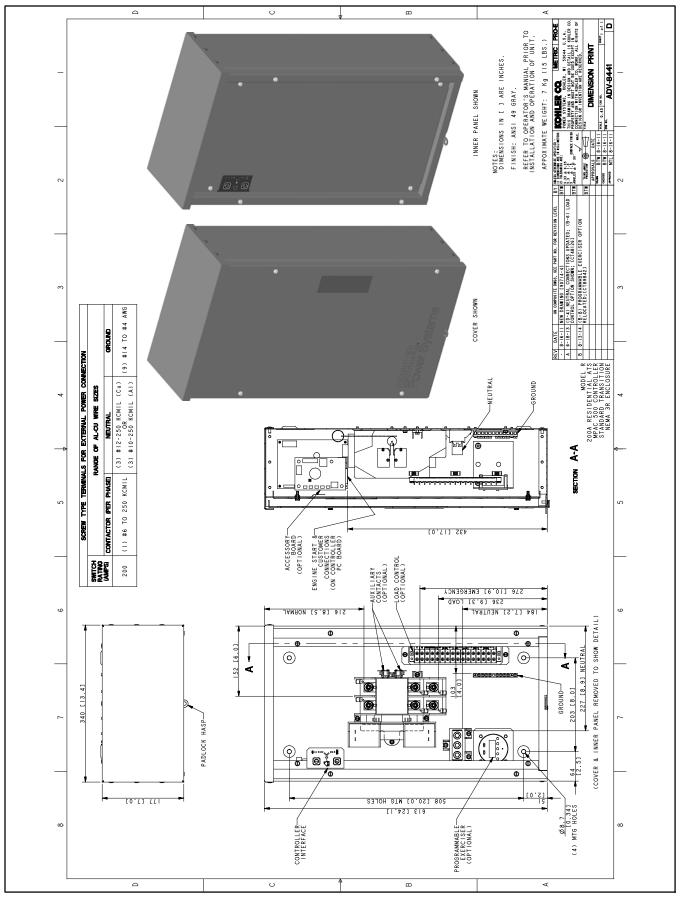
Dimension Drawing, 200 Amp NEMA Type 3R Enclosure without Load Center, ADV-8441
